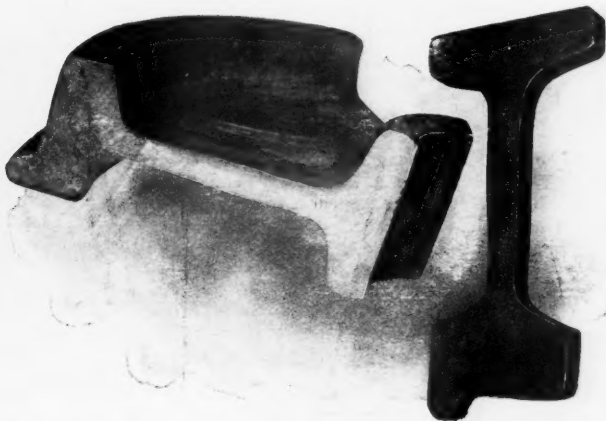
Sections of Solid Forged and Rolled Steel Wheel.
